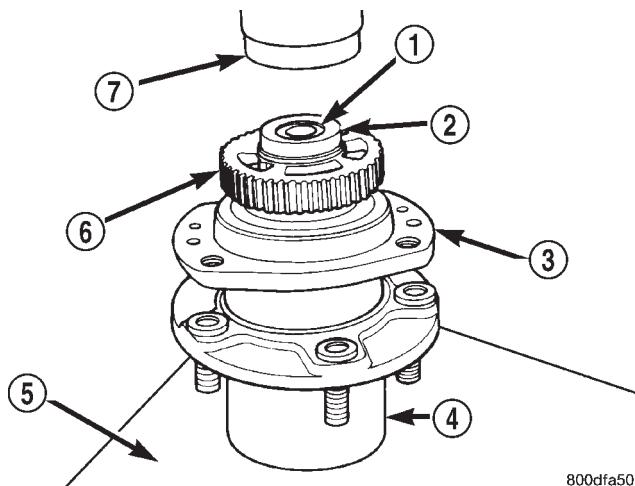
Installing Tone Wheel On Hub/Bearing Assembly
